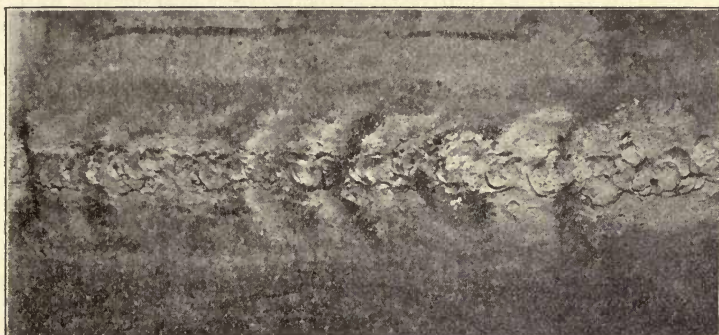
UPPER SIDE OF WELD MADE BY "POOL" WELDING.
